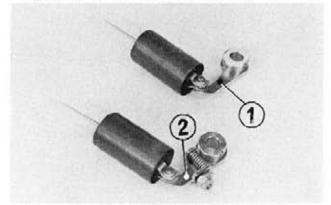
1 Link arm for No. 2 carburetor 2 Link arm for No. 1, 3 and 4 carburetor
